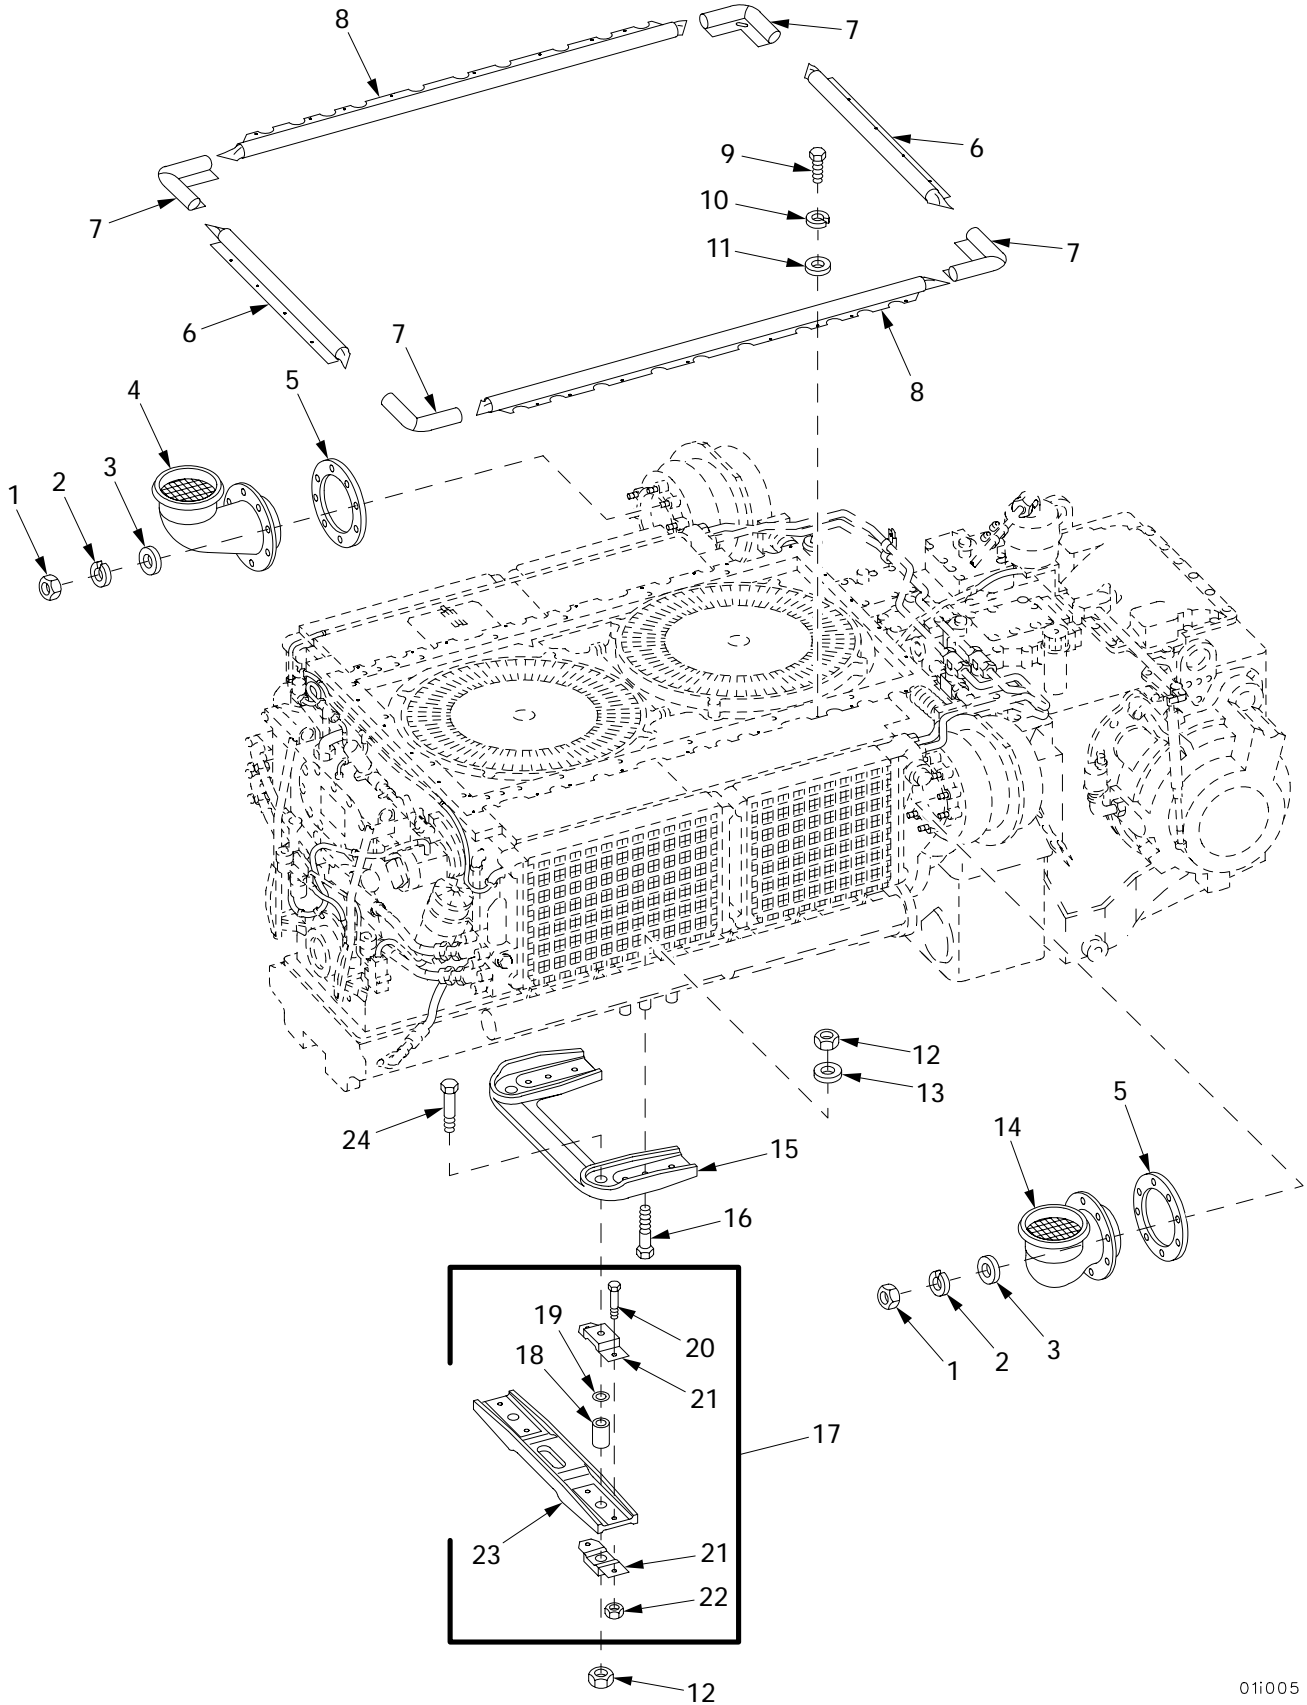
Engine Shroud Seals, Air In-take Elbow and Engine Mount Assembly
